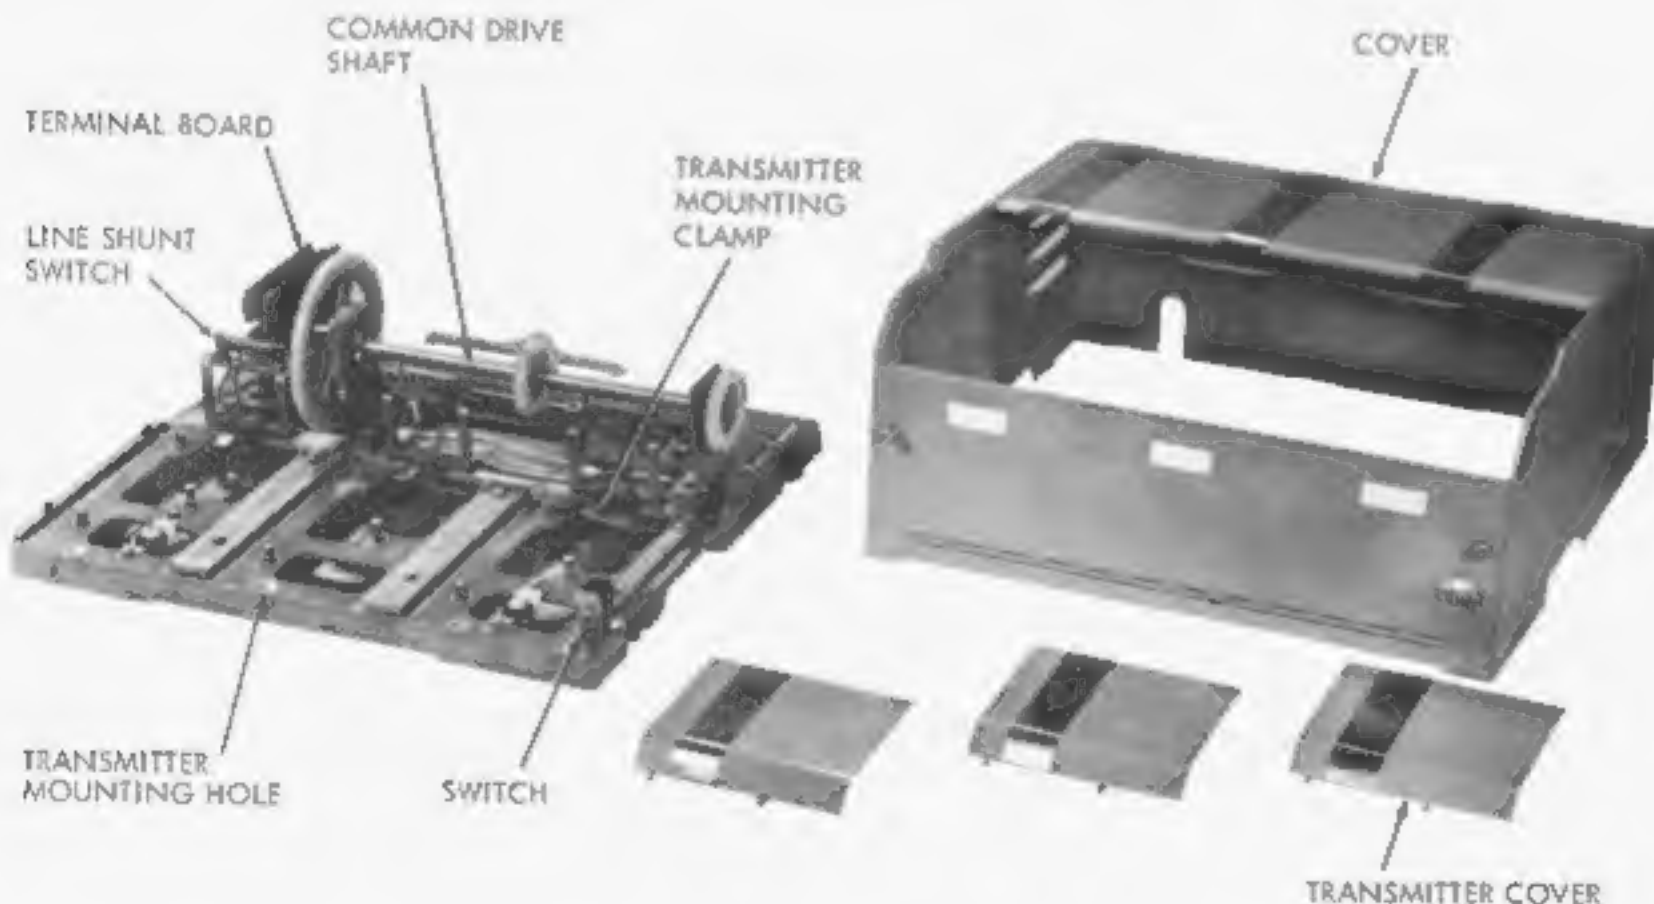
MULTIPLE TRANSMITTER DISTRIBUTOR BASE (LMXB) AND COVER
